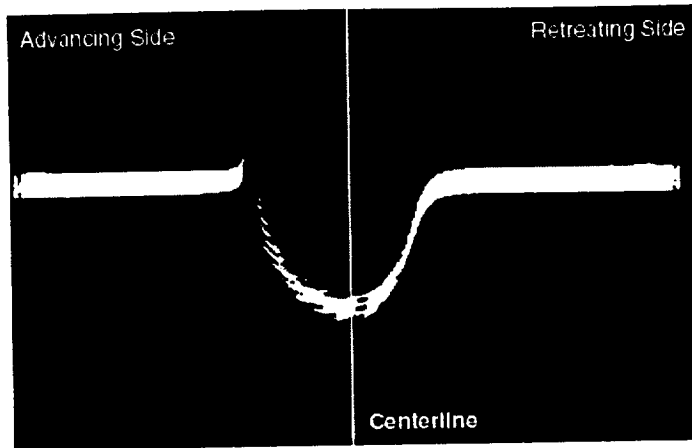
The images of the advancing (Figure 5-1) and retreating side (Figure 2-1) markers are combined and binarized in one image (c) at the middle of Weld 38 (0.61 mm/rev). The tool rotation was clockwise.
